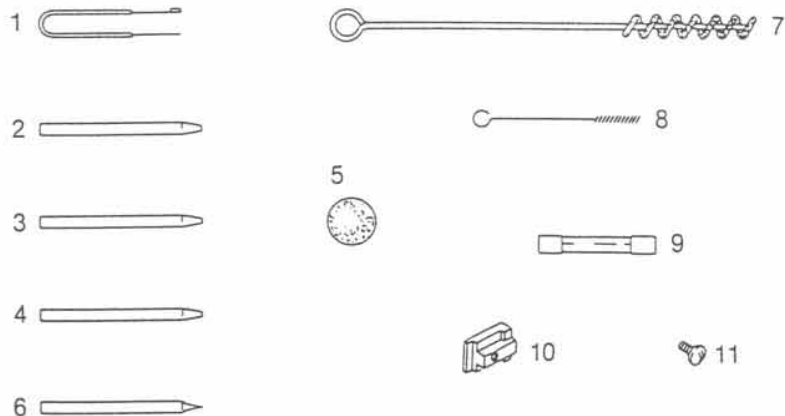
REPLACEMENT PARTS FOR ACCESSORY KIT(S)
